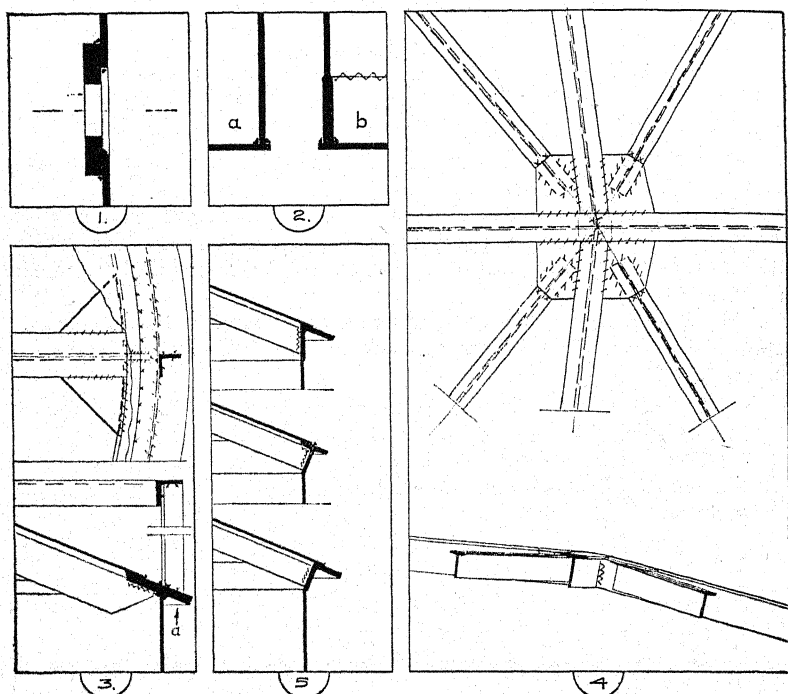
Joining flanges for pipes. Fig. 2a. Shell plate welded direct to bottom without circumferential angle. Fig. 2b. Method of providing additional stiffness to joint. Fig. 3. Joining of shell to roof. Fig. 4. Truss joint for framing of tank dome. Fig. 5. Angle or T-bar to obviate overhead welding which plate ring, Fig. 3, requires.
